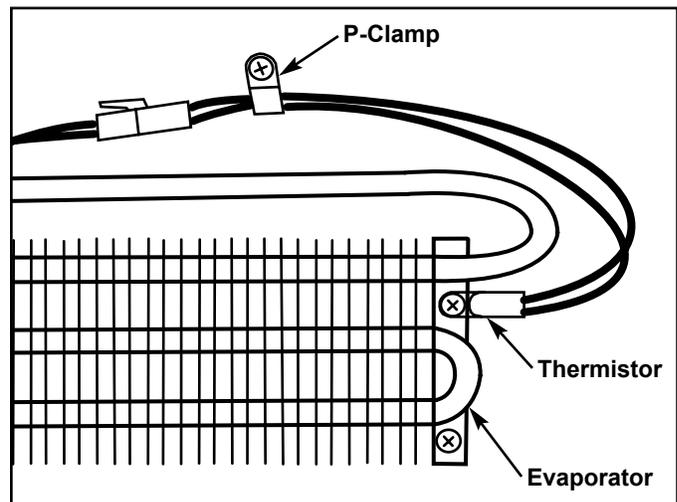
427R Refrigerator Evaporator Thermistor
